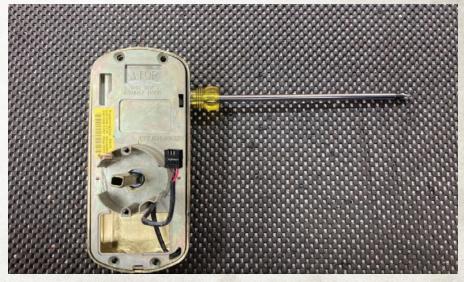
Placing a screwdriver under the lock helps keep it level and the spindle upright.
